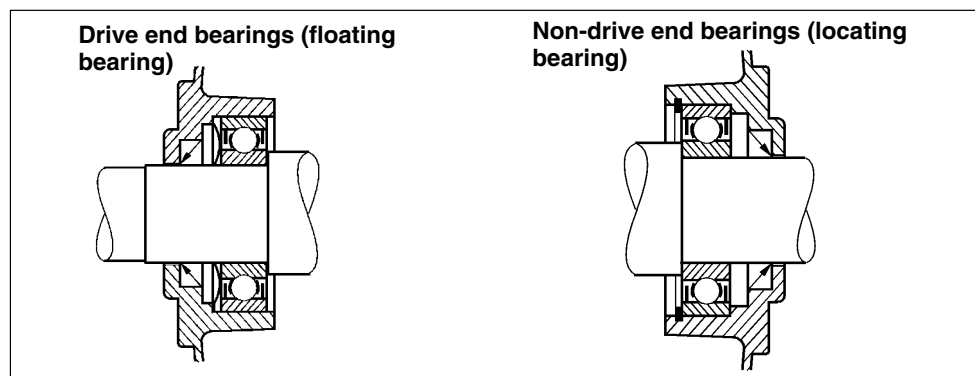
Basic version for shaft height 160, locating bearing at the non-drive end NDE
